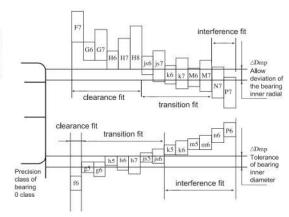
Shaft and shell fit relation of size tolerances (Class P0 precision for bearing)
